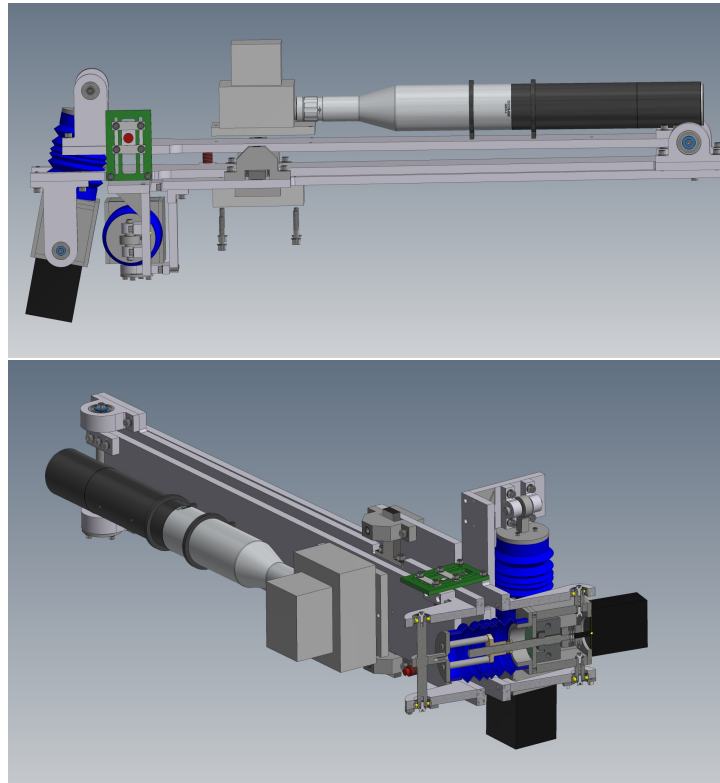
CAD model of the new laser mount. Side view (top) and inclined view with cross-section (bottom)
